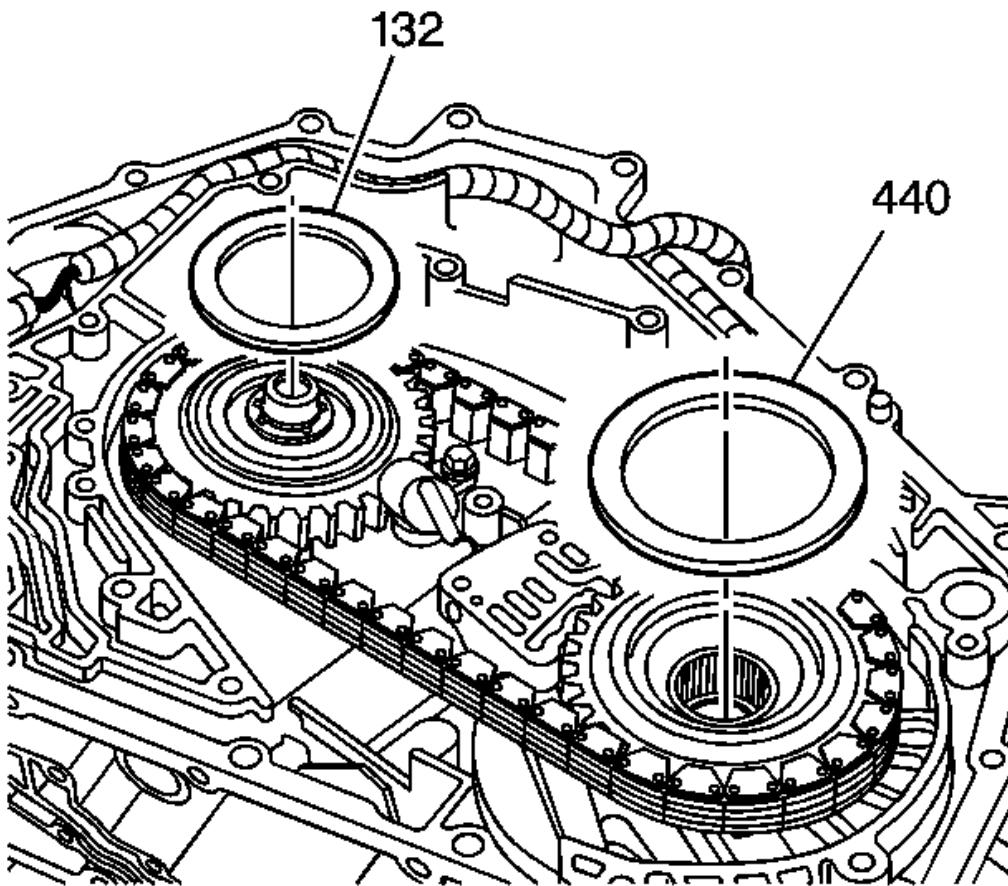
Locating Drive And Driven Sprocket Thrust Bearings
